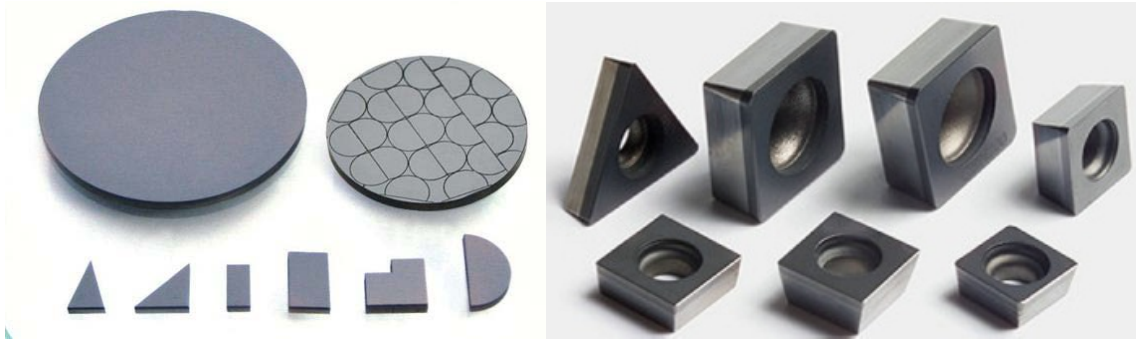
Demonstration of PCBN blanks and tool inserts
